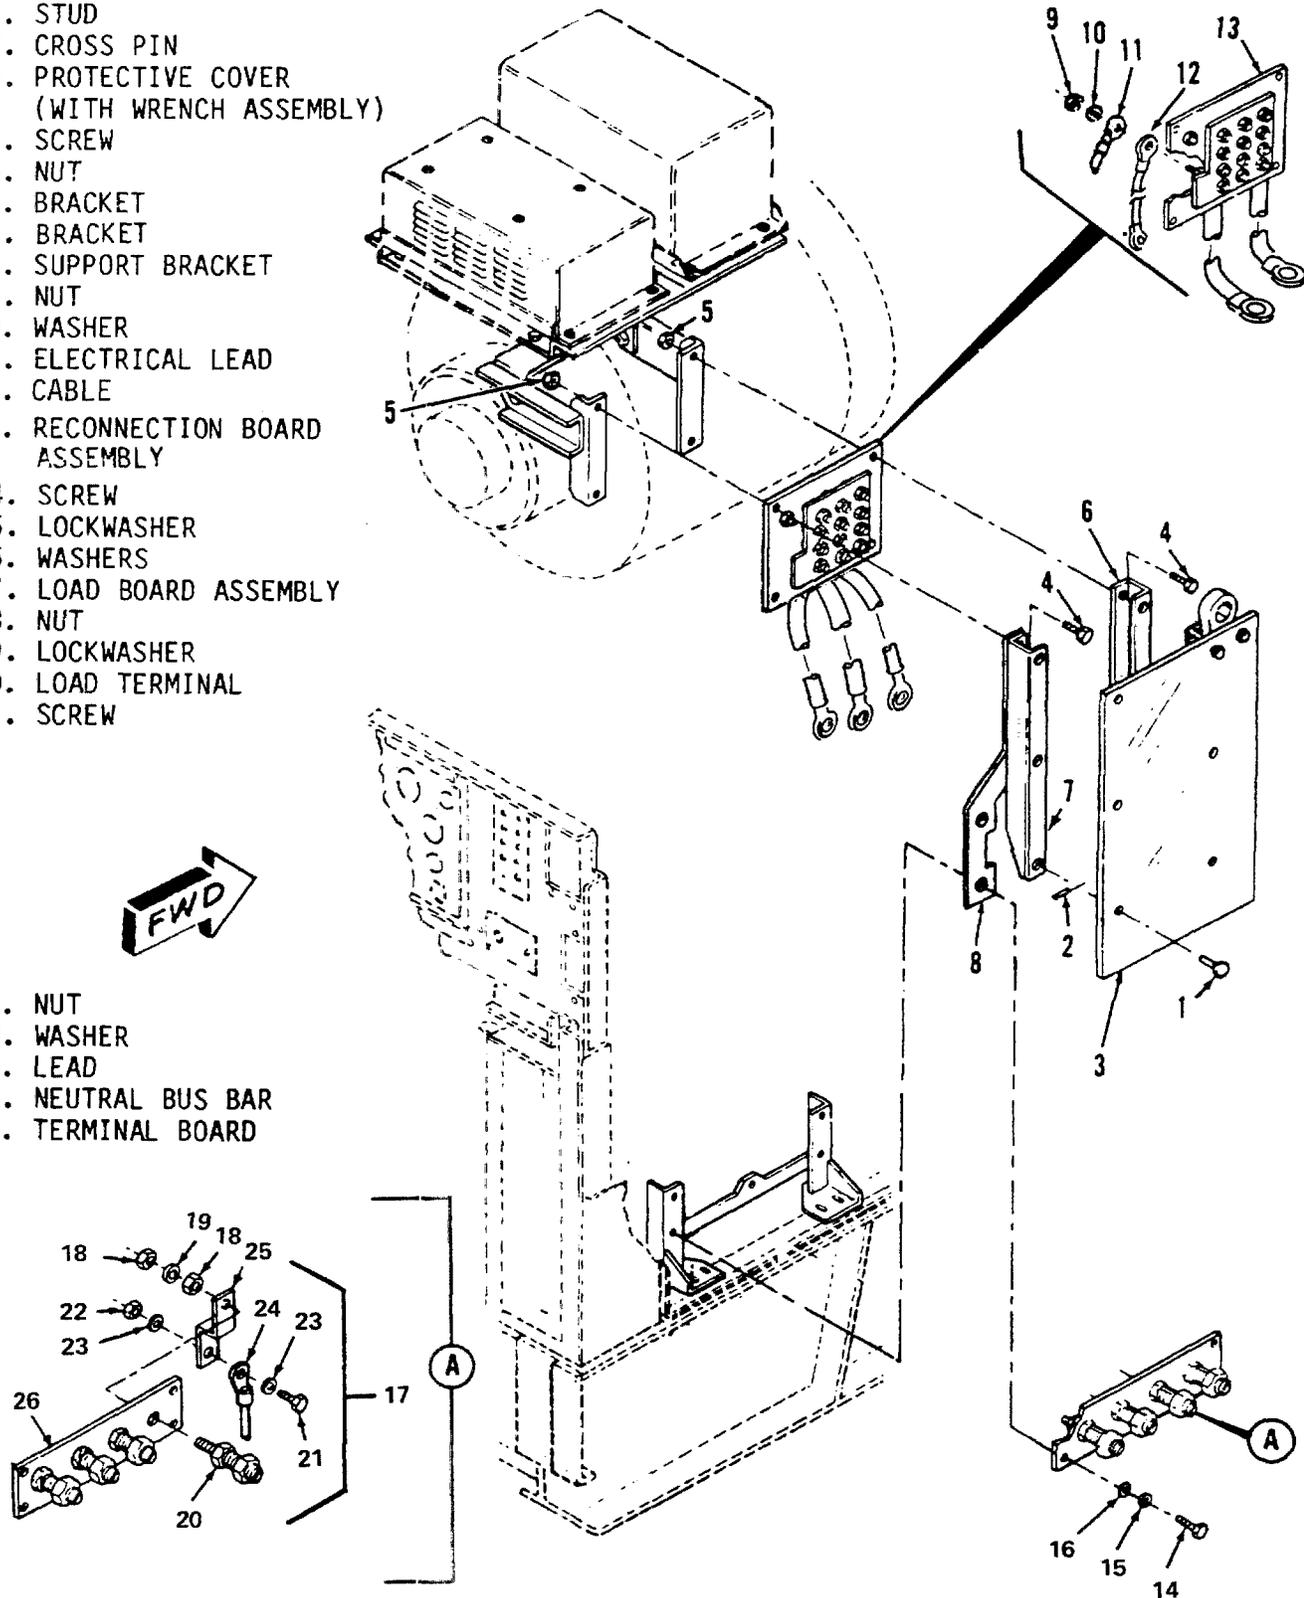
Reconnection Board Assembly and Load Board Assembly, Removal and Installation
